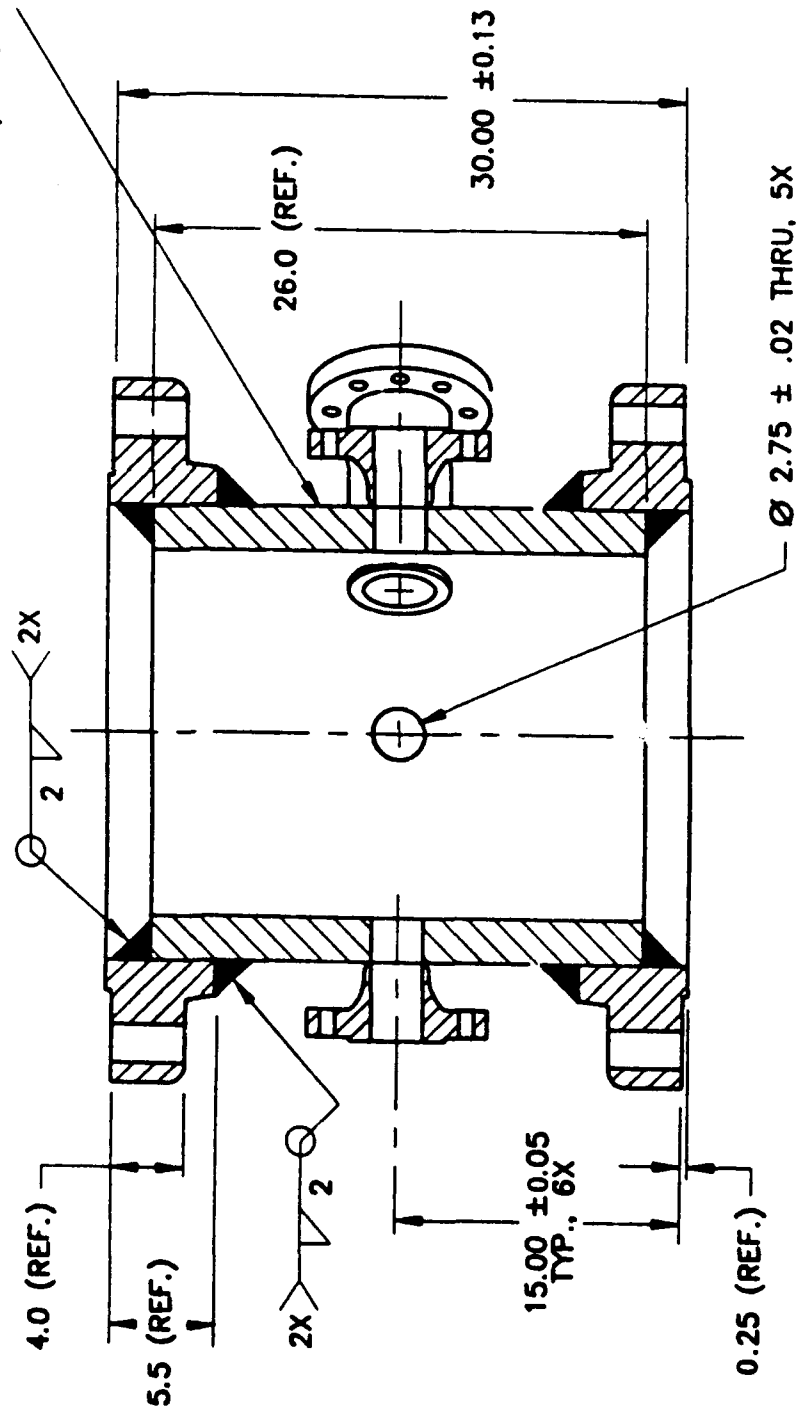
Design Drawing of Pressure Vessel - Side View.
